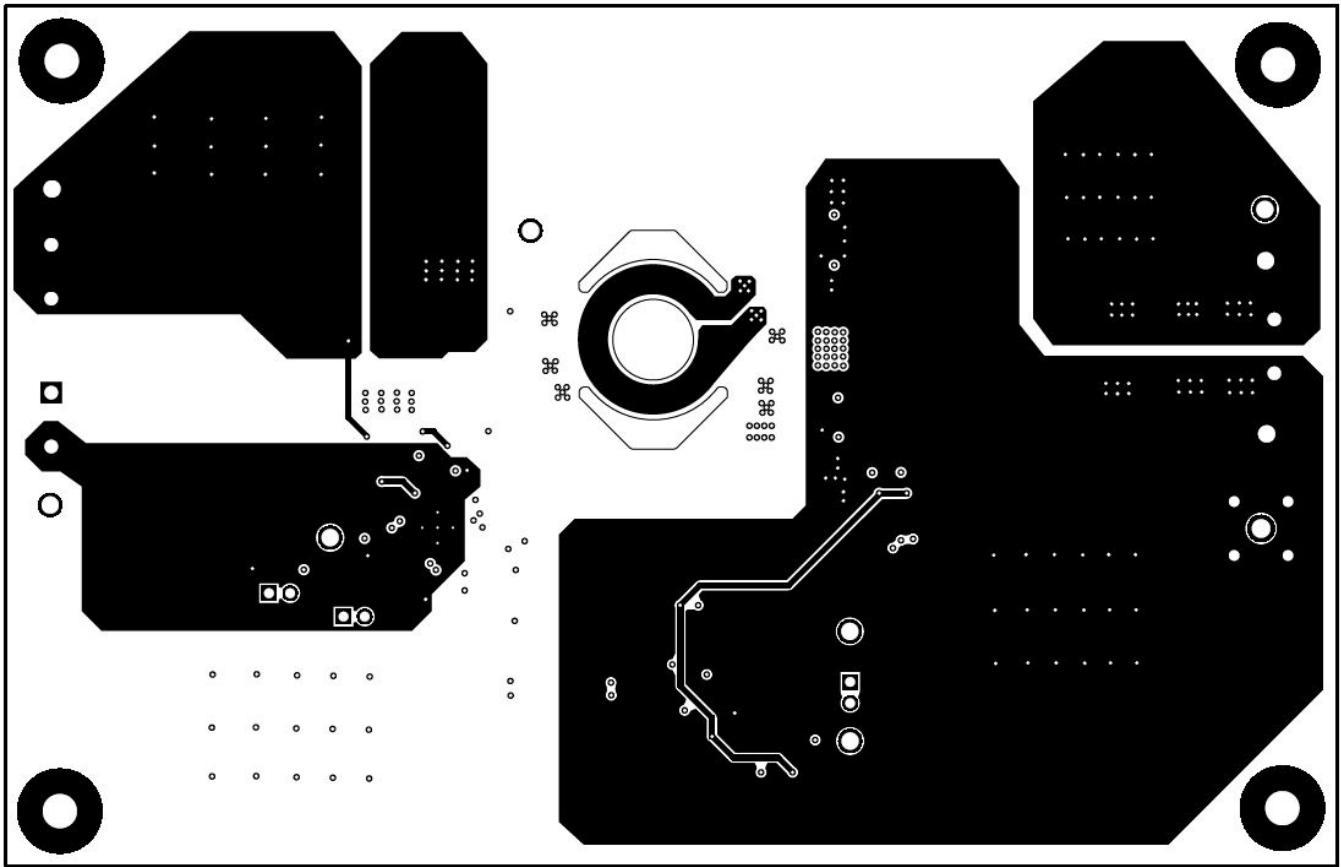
LM5036 EVM: Layer 2 PCB Assembly layout
